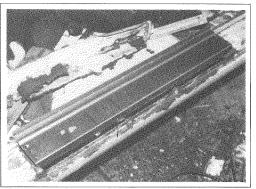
Given a little modification, another tread plate is an ideal basis for the replacement floor edge. Start by carefully marking out the mounting bracket postion on the repair panel.
